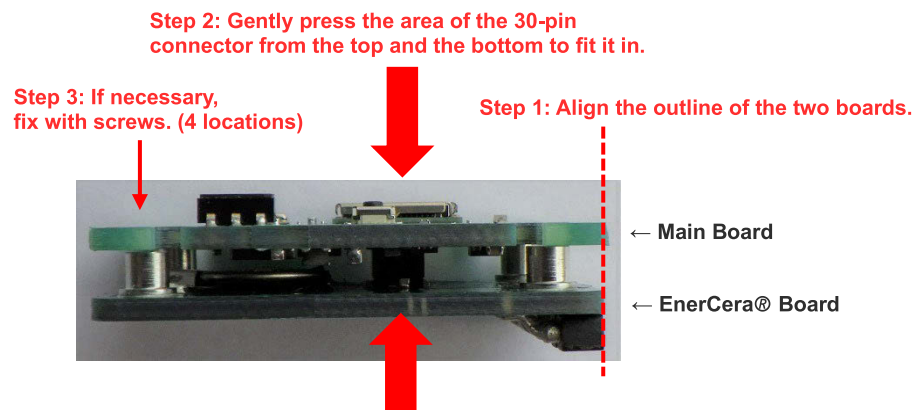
Connection of Main Board to EnerCera® Board (Side View)
